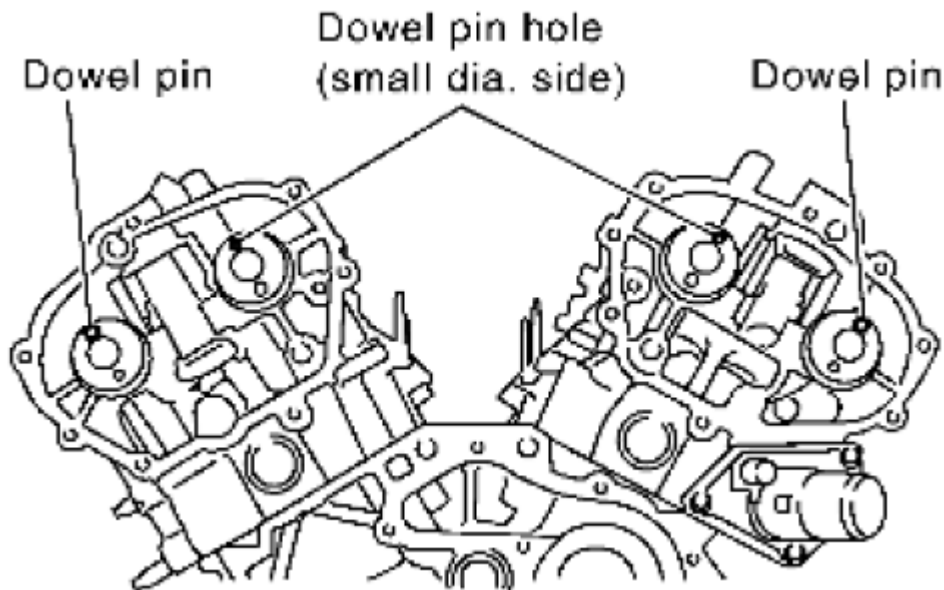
Identifying Dowel Pin Hole And Dowel Pin Location
